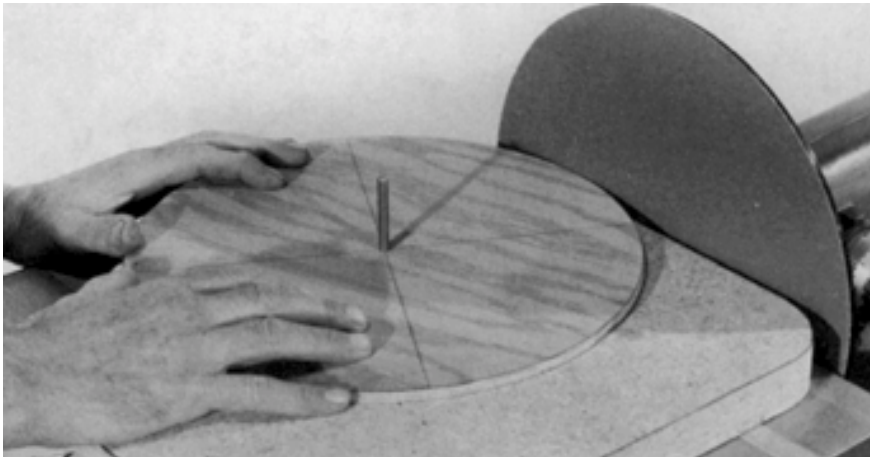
Use a guide to sand curved workpieces to a uniform width. The edge that bears against the dowel must be smooth and true.
